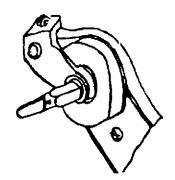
Later type 3 312-14302 inner half arm assembly w/bearing
